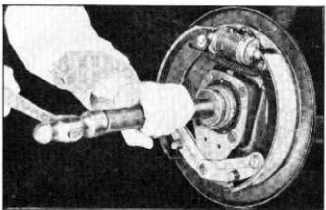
Axle Shaft Bearing and Oil Seal Replacer
